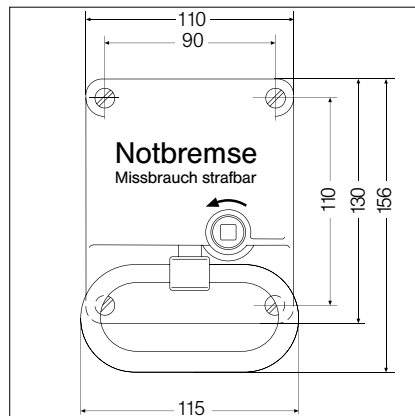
Emergency brake switch type series Kiepe NBS 200 for socket spanner
